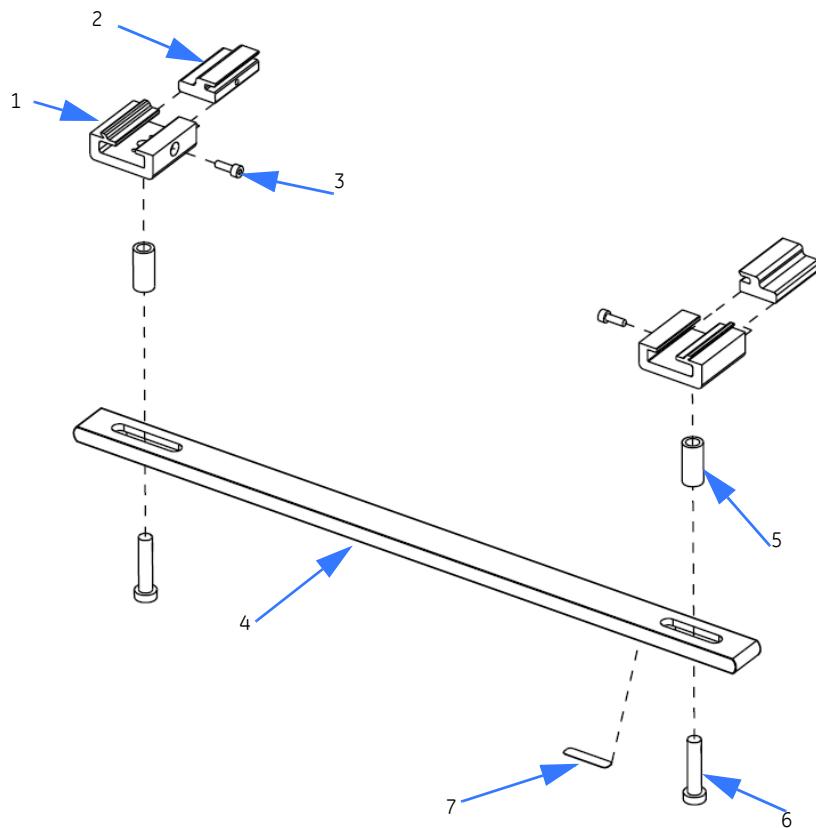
Dovetail Mount DIN Rail (6600-0659-803)
